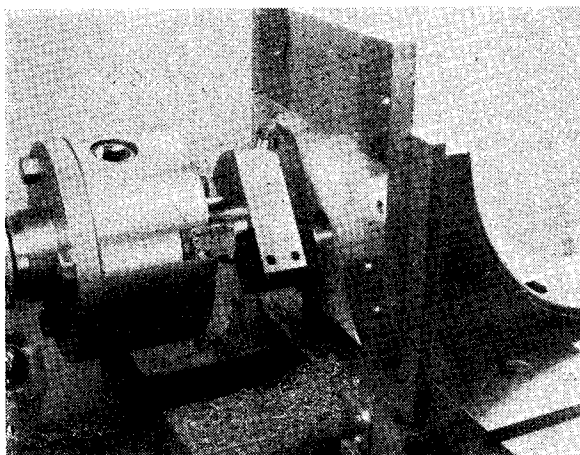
Fly-cutting the top-slide seating on the vertical plate
